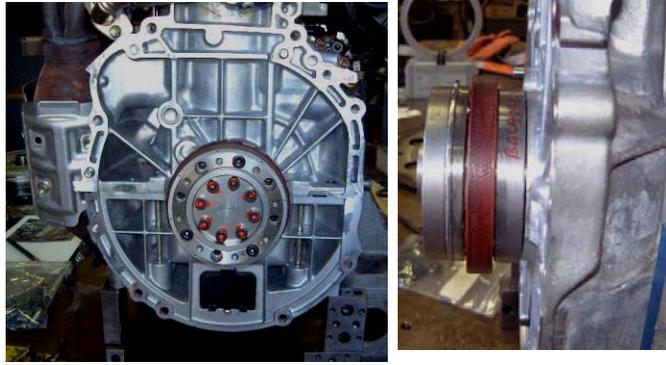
Toyota Opa Crankshaft Torque Sensor [5]
